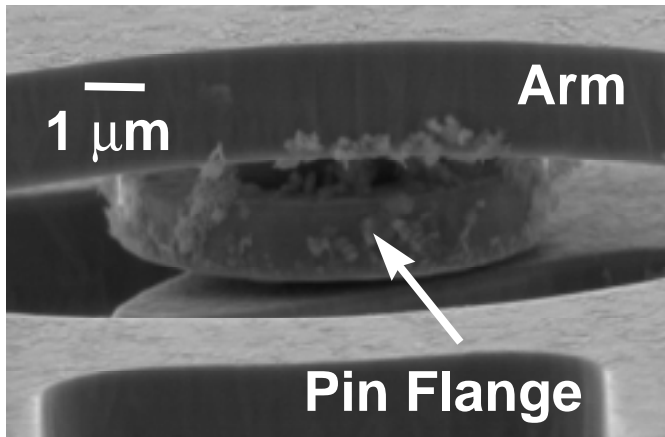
SEM image at high tilt angle which reveals wear debris adhering to the upper drive pin flange beneath the drive arm of a binary counter tested to failure due to pin breakage.
